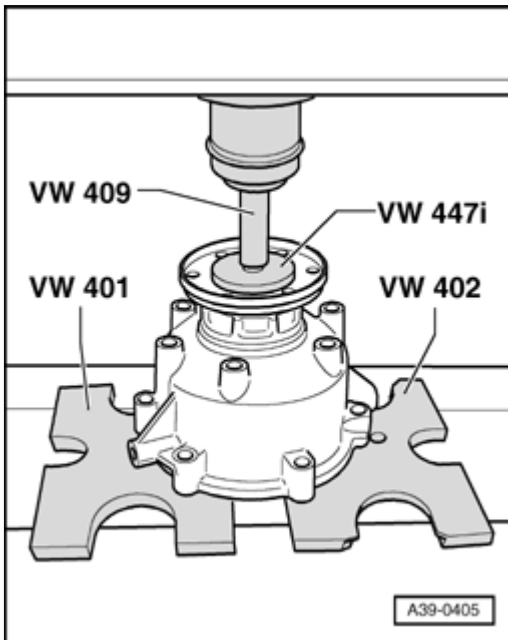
Pressing Flange Shaft Using Punch VW 409 And Thrust Pad VW 447 I Into Torsen Differential Cover By Placing Cover On Thrust Plate VW 401 And Thrust Plate VW 402
